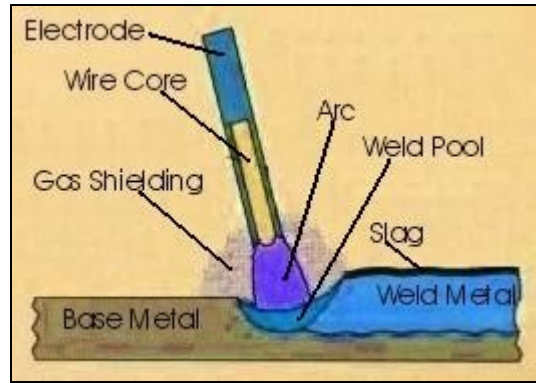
Shielded Metal Arc Welding Process.
